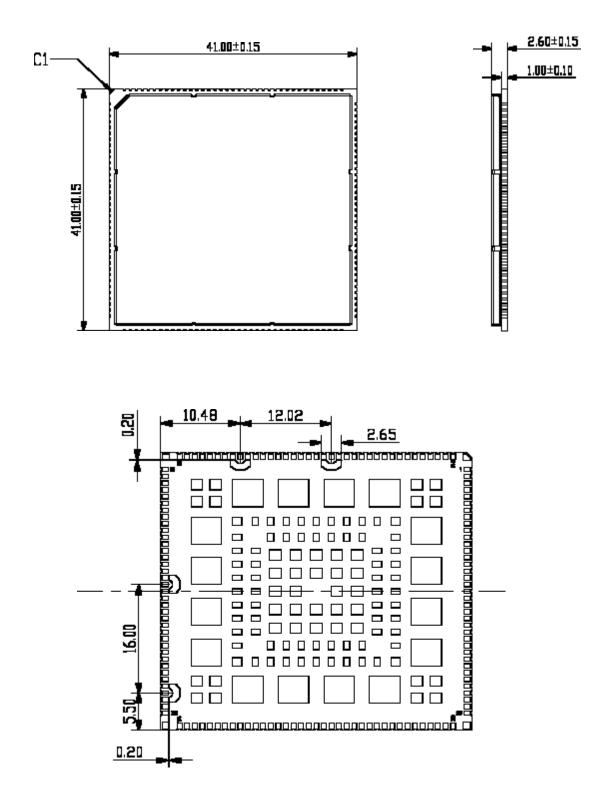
Three-dimensional dimensions of the module (unit: mm)
